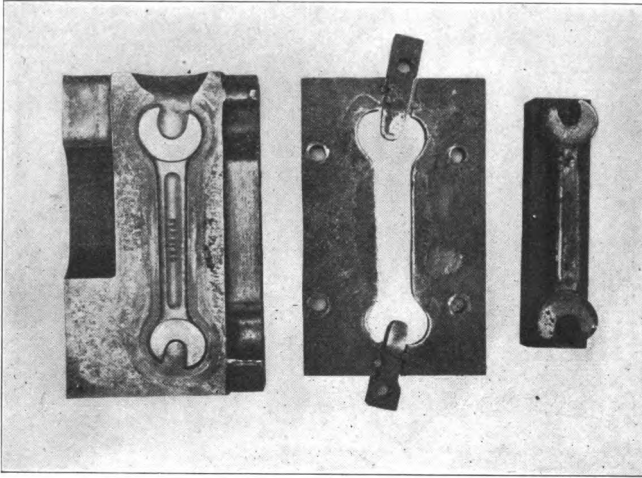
Drop Forging Die for Wrench and Trimming Die for Same
